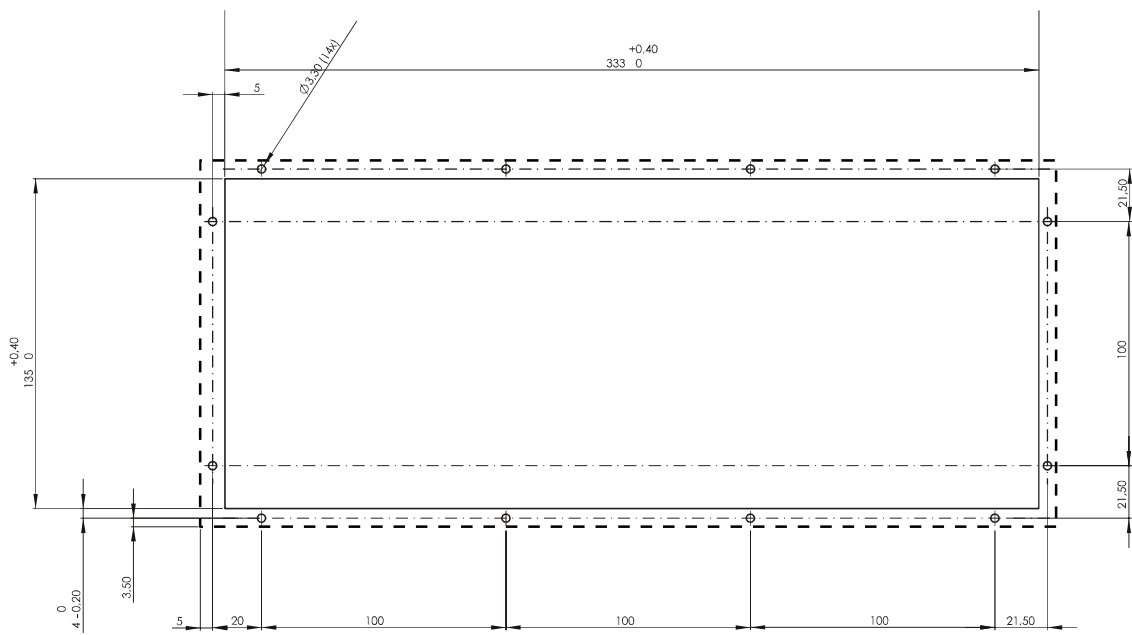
Transas ES4 dedicated keyboard. Keyboard mounting hole
